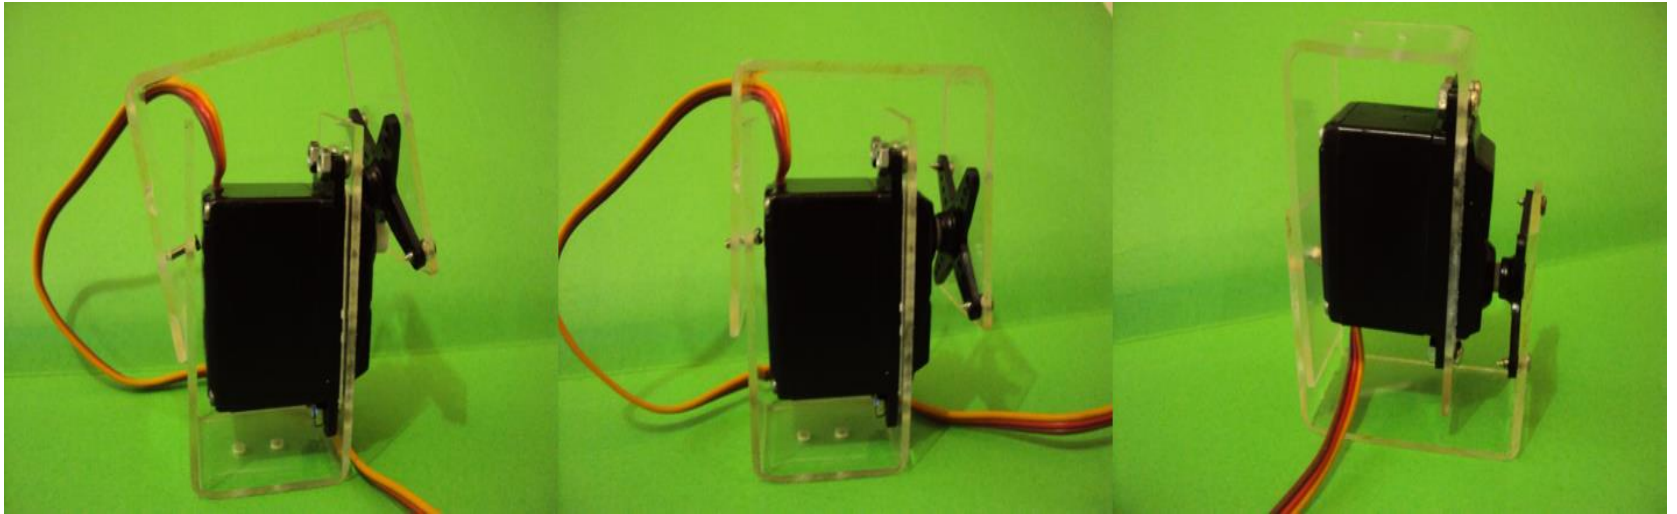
Joining Bracket A and B, Horn assembly connected to servo
